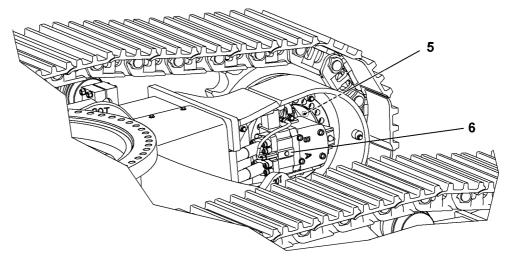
Arrangement of mechanical brakes 5 and hydraulic brake valves 6
